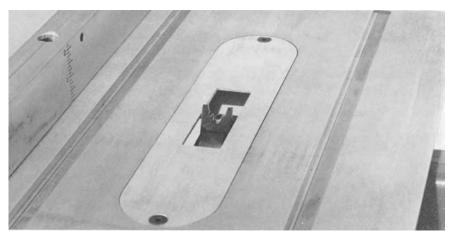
The molder head must always be used with the special molder insert (Model 500 insert shown).
